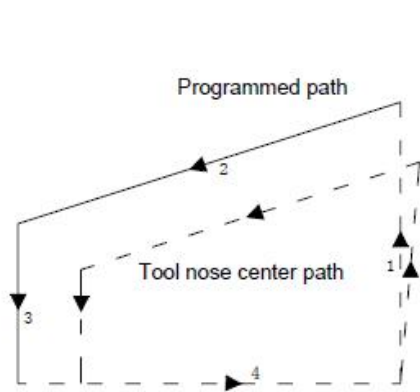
Offset direction of G90 tool nose radius compensation
